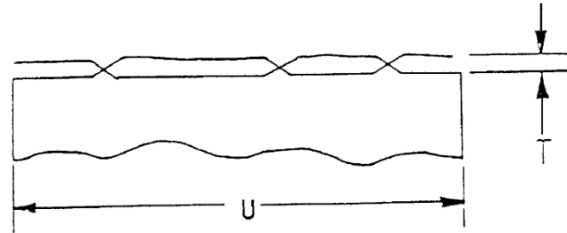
MACHINED SURFACES SQUARENESS MEASUREMENTS
